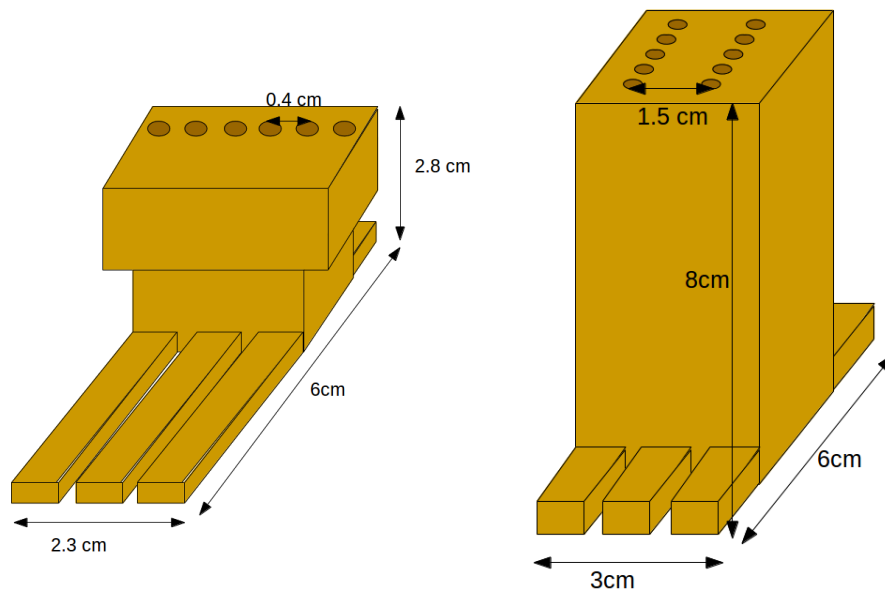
3D view of copper mount used for edge emitting devices and surface emitting devices. .
